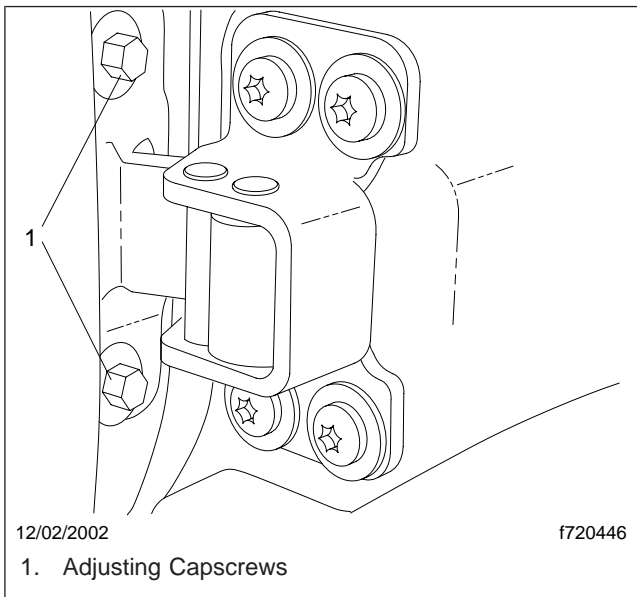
, In-and-Out Adjusting Capscrews on the Door
